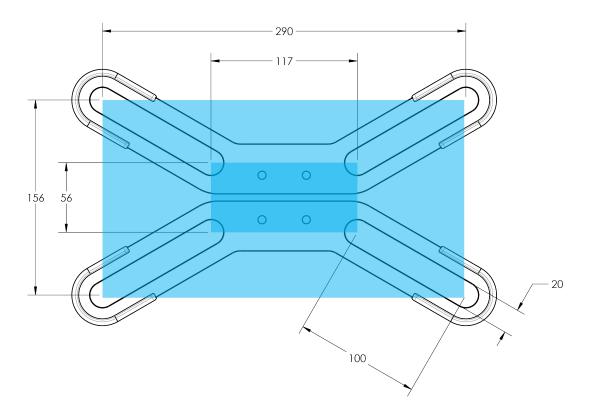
Techinal Dimensions of the Large Suction Cup Brackets
